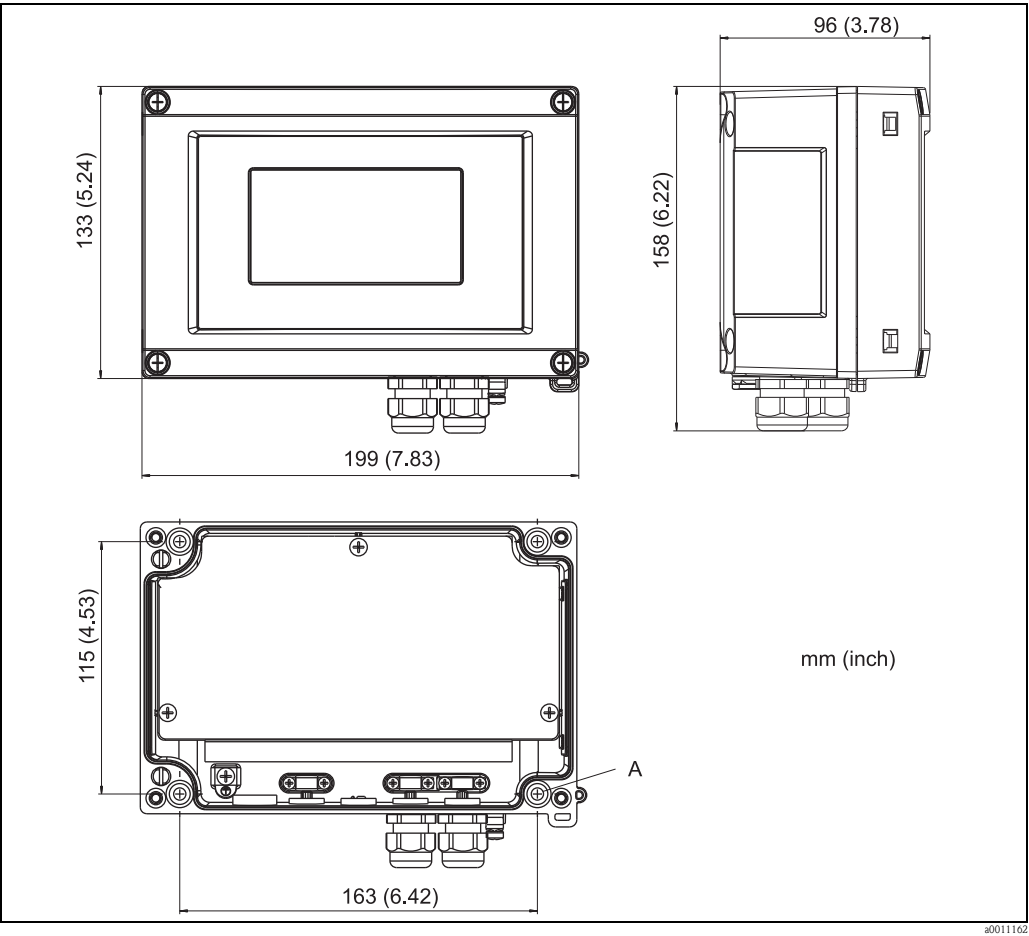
Dimensions in mm (dimensions in inches in brackets)
